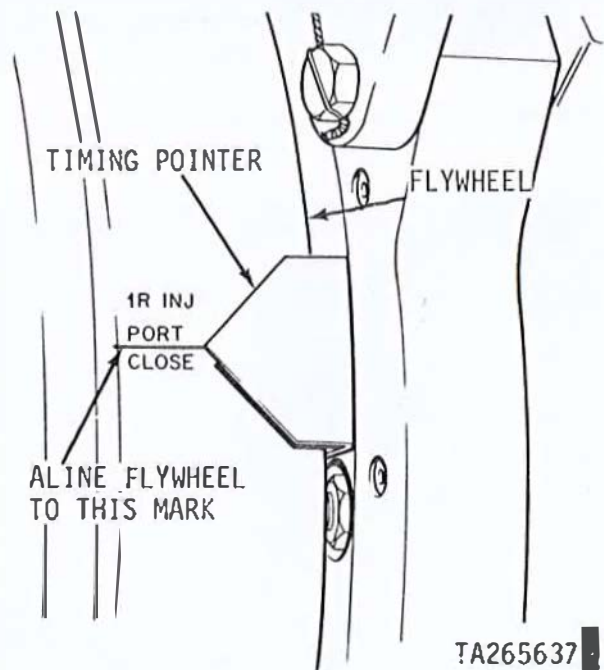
Flywheel in position for fuel injection pump timing, model AVDS-1790-2C and AVDS-1790-2D engines.
